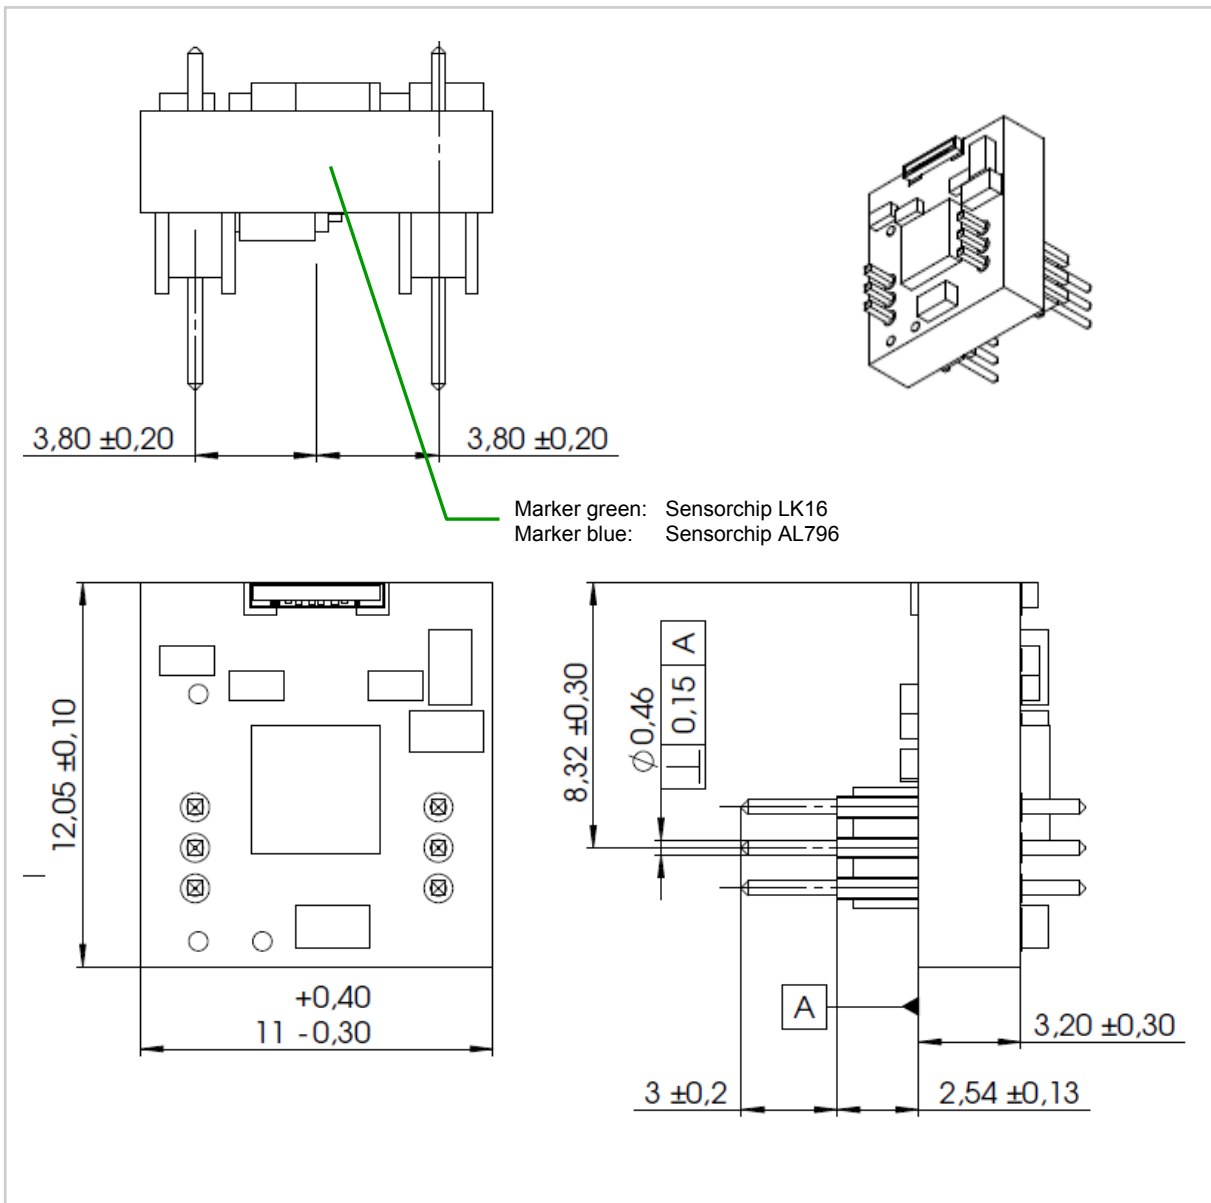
PCB outline (all dimensions in mm unless otherwise specified).
